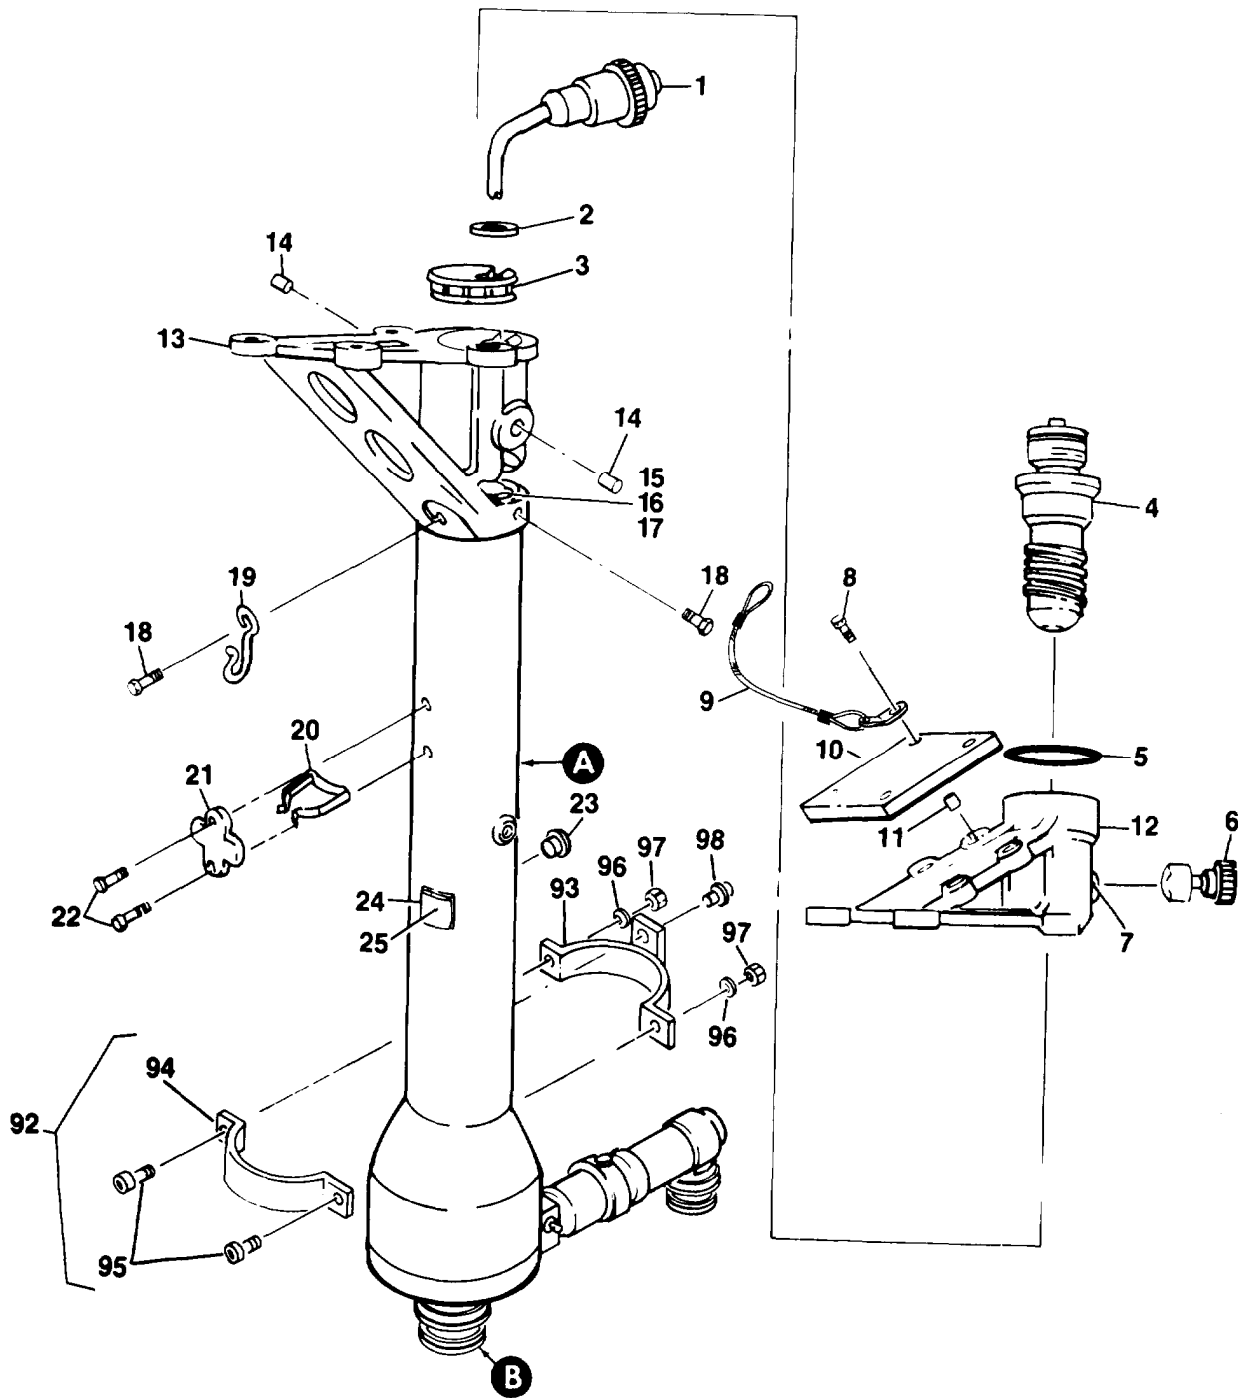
BOOM POSITION SUPPORT ASSY (SHEET 1 OF 3)
